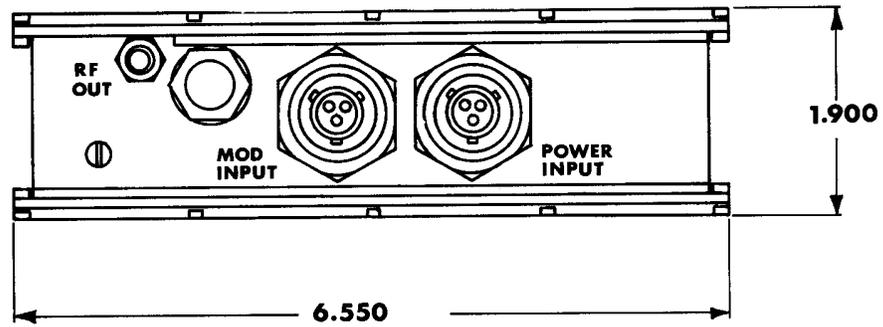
Model EM4527 Transmitter Outline Dimensions
